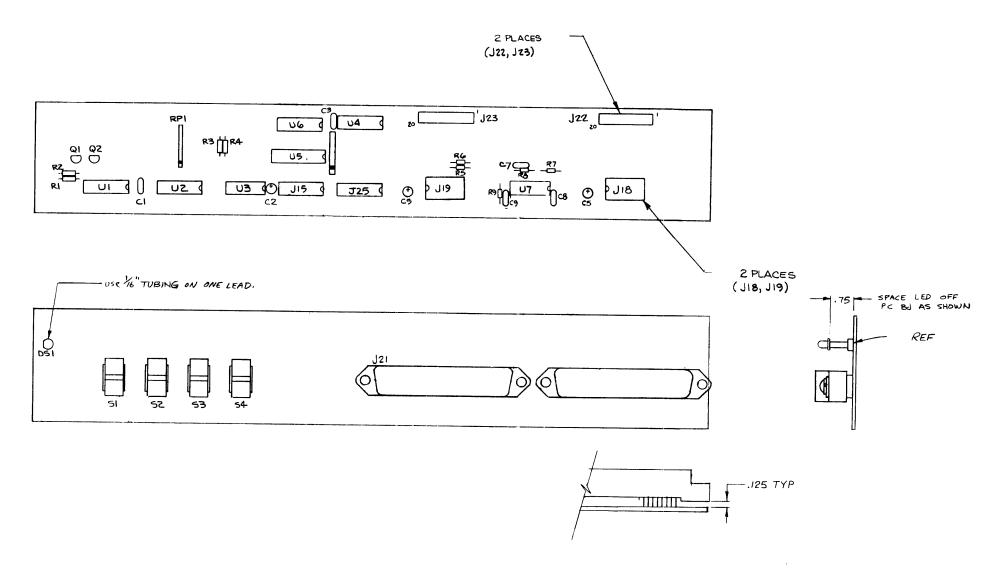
Front Panel PWB Assembly, 0112-0115
